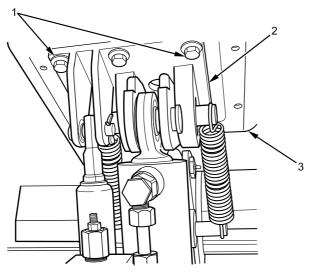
Upper Door/Ramp Lock Bracket Front Bolts.
